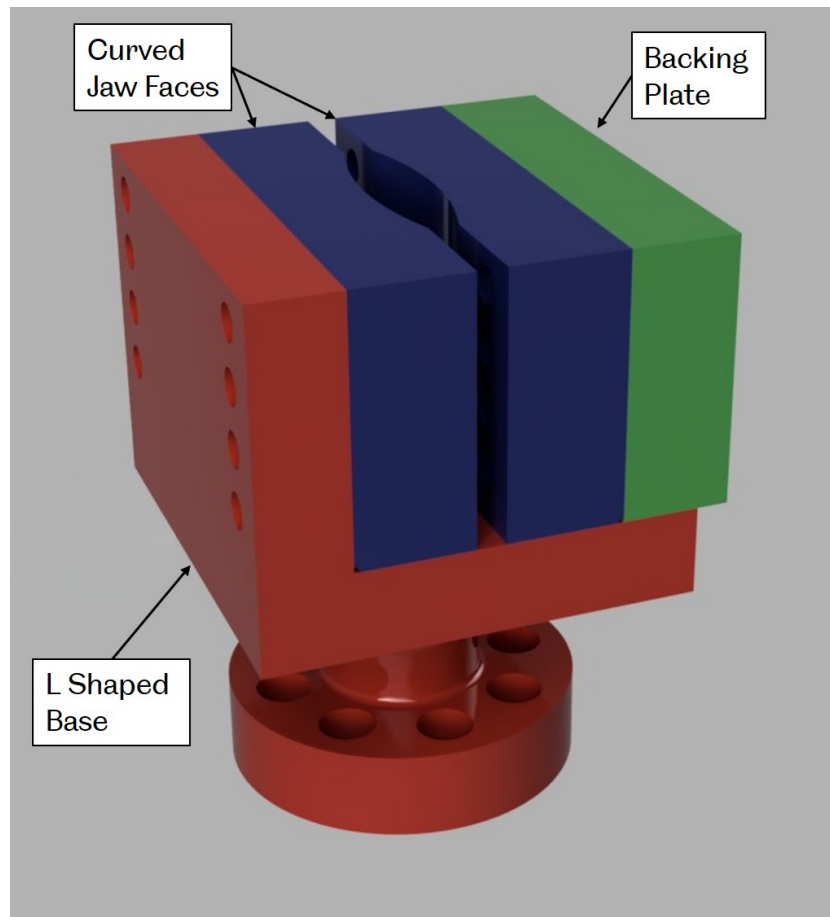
Rendered CAD model of jaw assembly produced for the project
